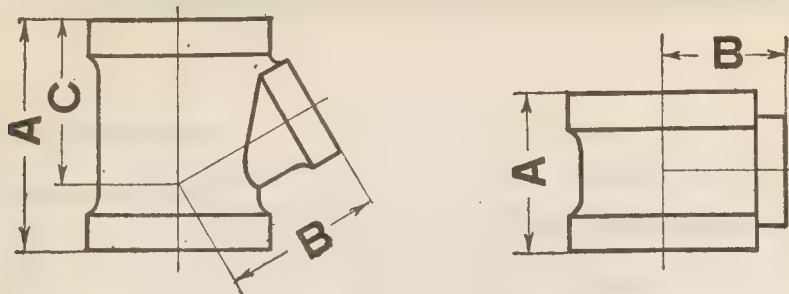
,064.—Dimensions of Essex reducing 60° Y.
